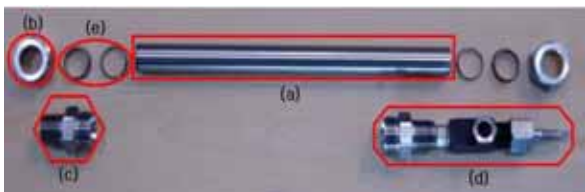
Assembly of a burst specimen with unflawed tube (a) Inconel 690TT (b) Nipple (c) Plug (d) Air valve (e) Swagelok fitting
